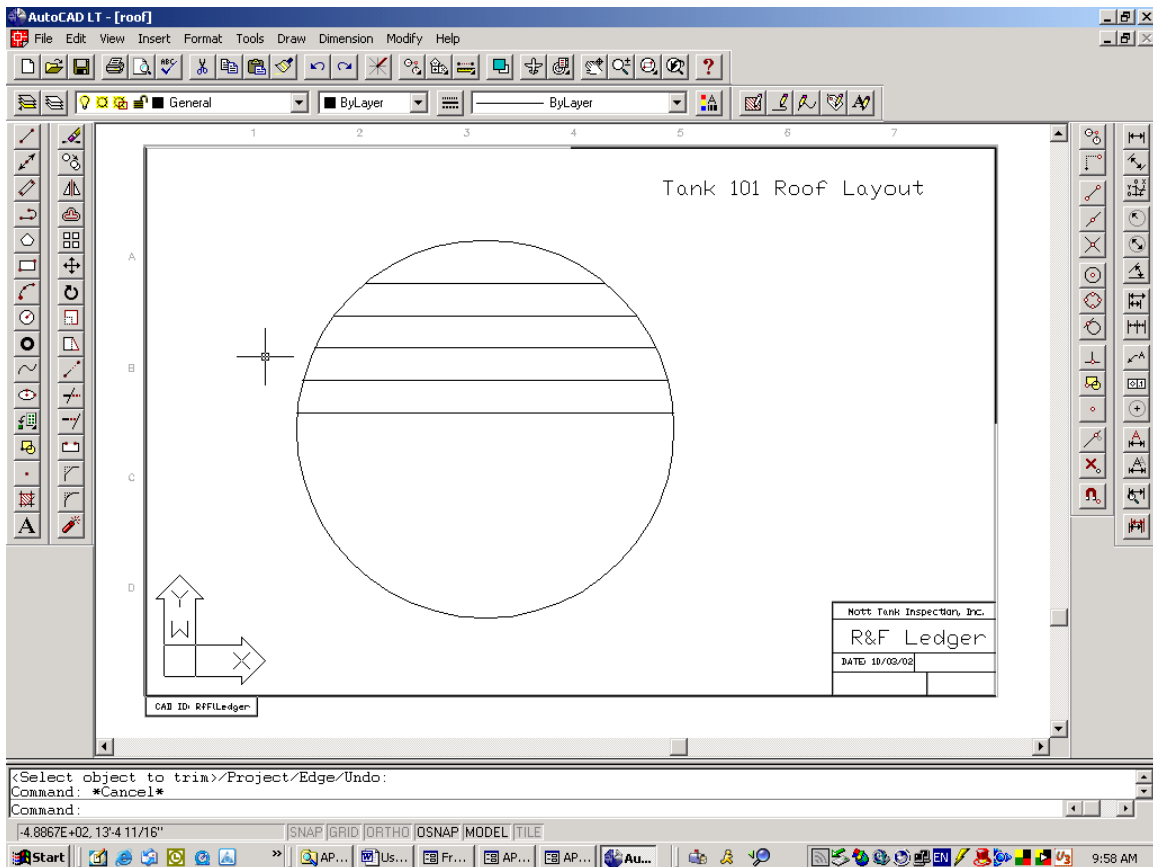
Roof Upper Horizontal Weld Seams
